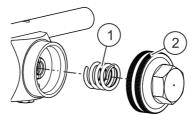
Unscrewing the sealing cap and removing the pressure spring
